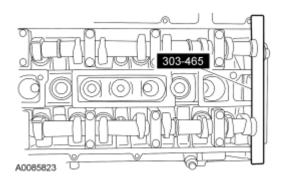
Identifying Special Camshaft Tool (303-465) Courtesy of FORD MOTOR CO.
